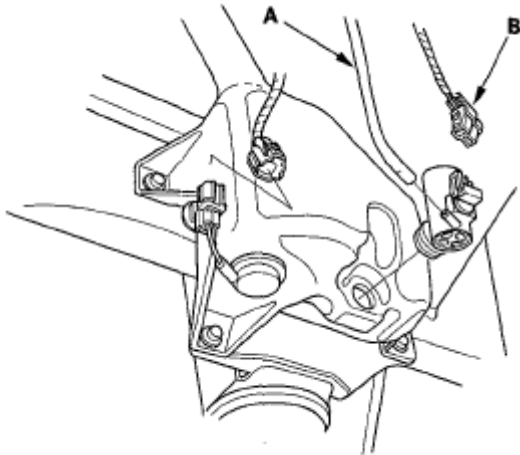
Identifying Washer Motor 2P Connector And Washer Tube
